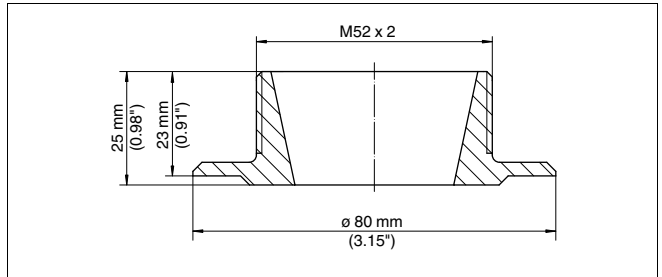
Dimensions welded socket conus connection M52x2
